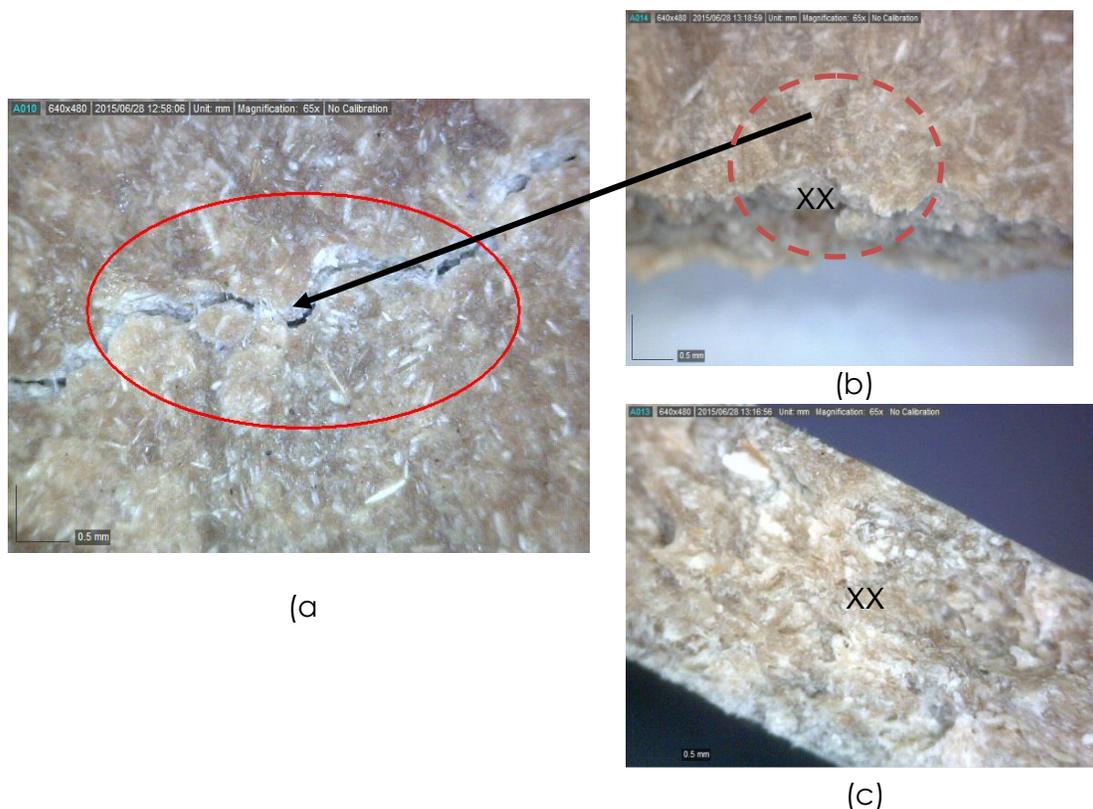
(a) crack opened (b) location of observation (c) fracture surface failure
